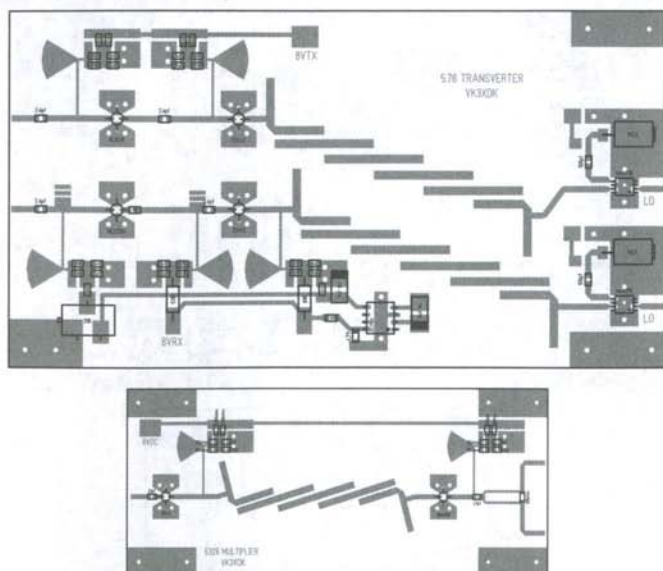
PCB layouts 5.7 GHz transverter and multiplier
